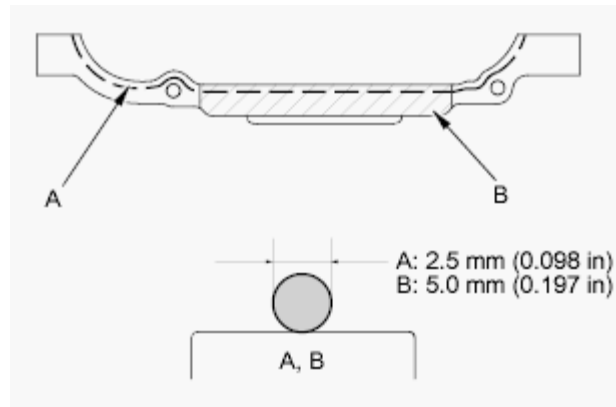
Identifying Liquid Gasket Applying Area On Oil Pan Mating Surface Of Chain Case & Inside Edge Of Bolt Holes
